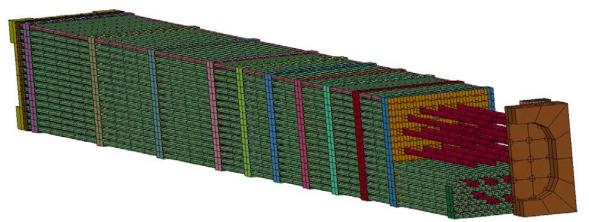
Detailed PWR 17x17 Fuel Assembly (Cutaway View)
